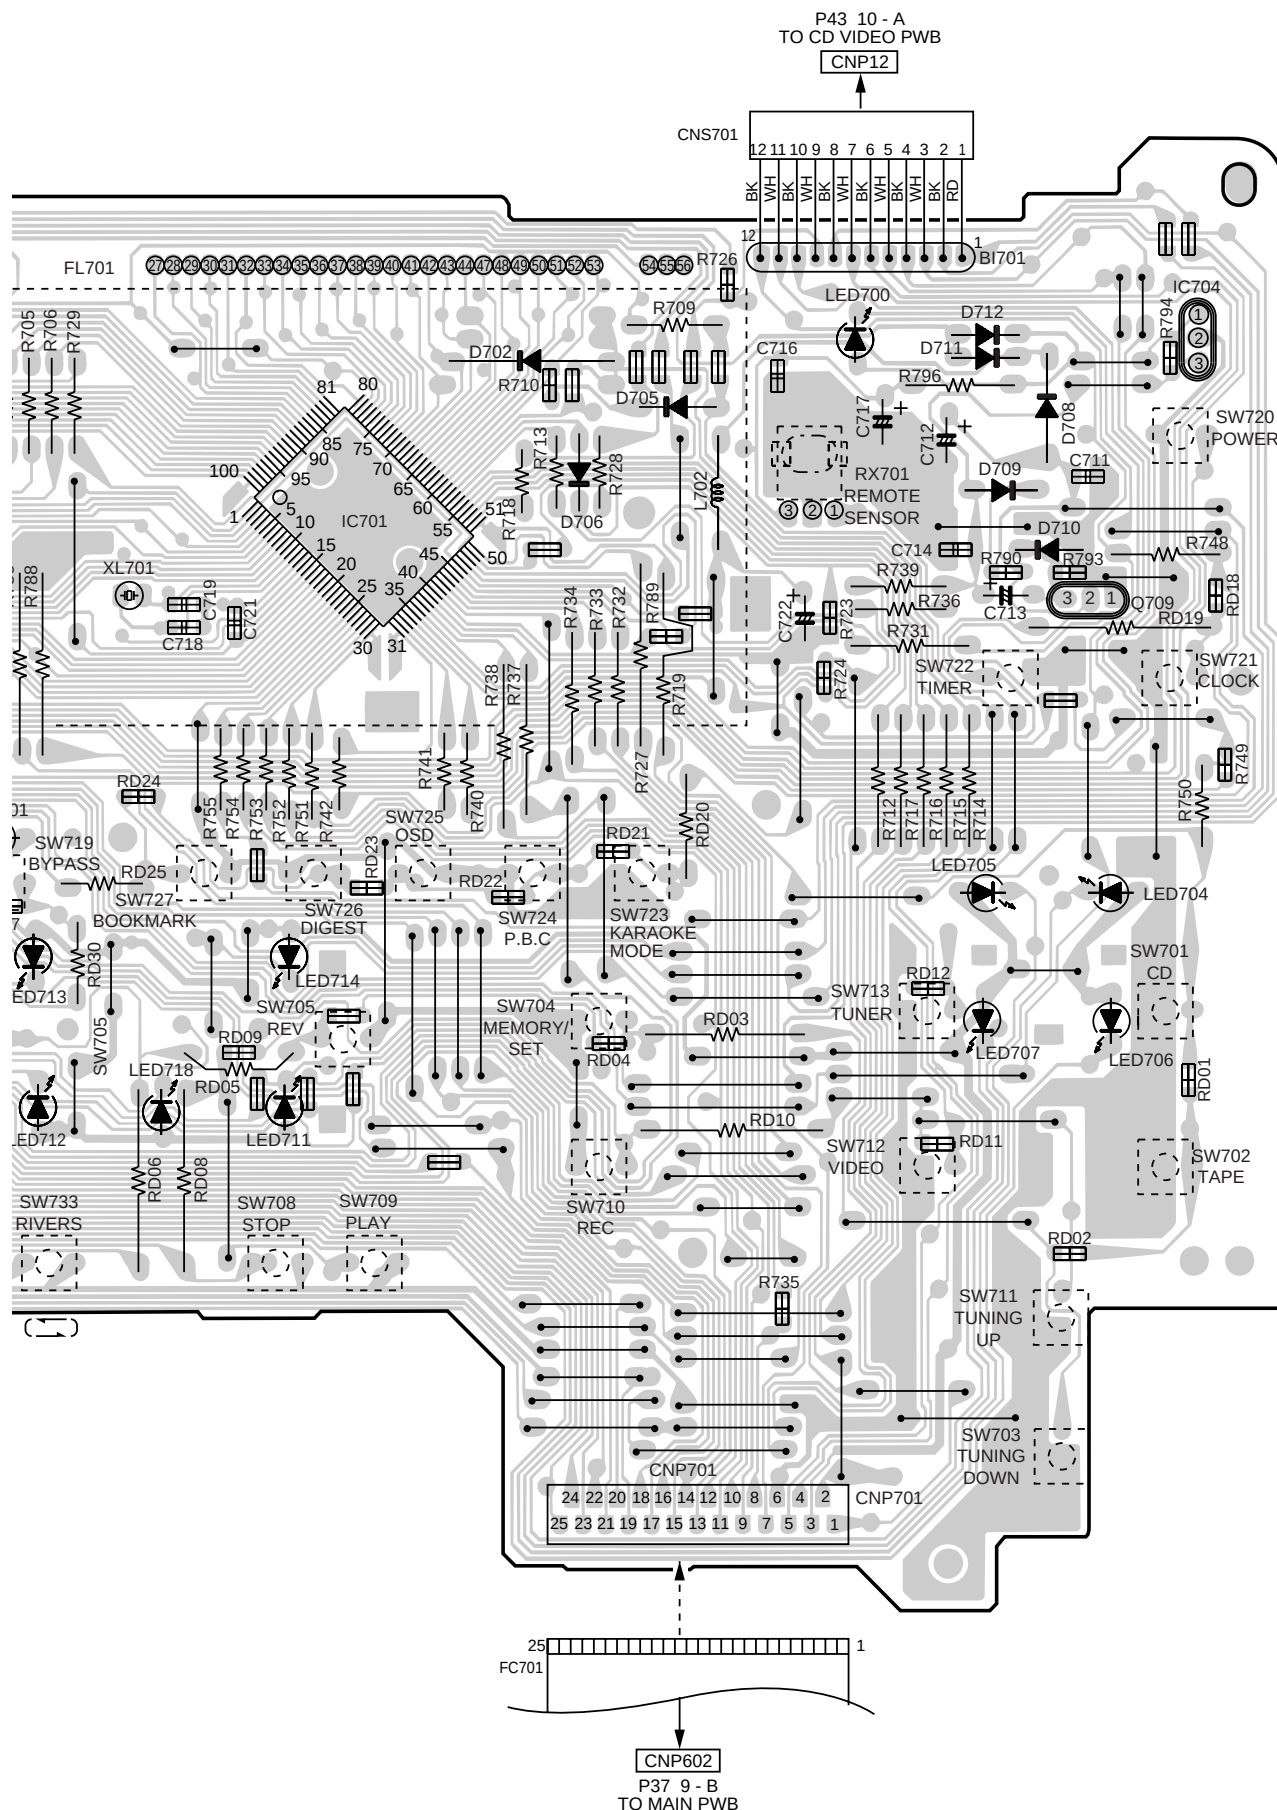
WIRING SIDE OF P.W.BOARD (5/9)
